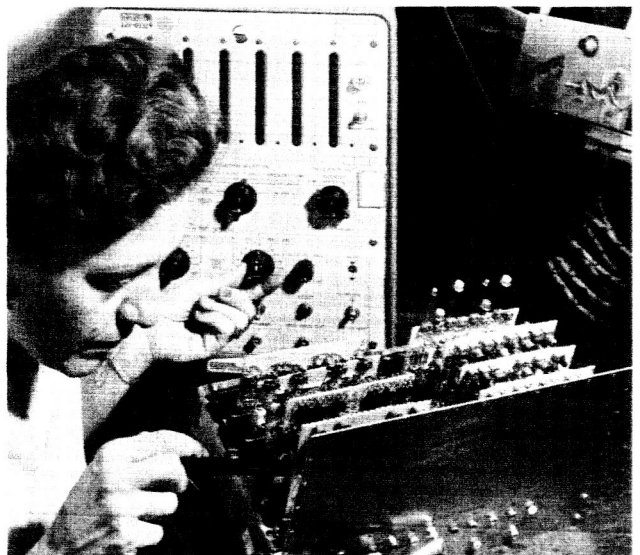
Electrical Checkout and Test of Sine Wave Generator Subassembly
